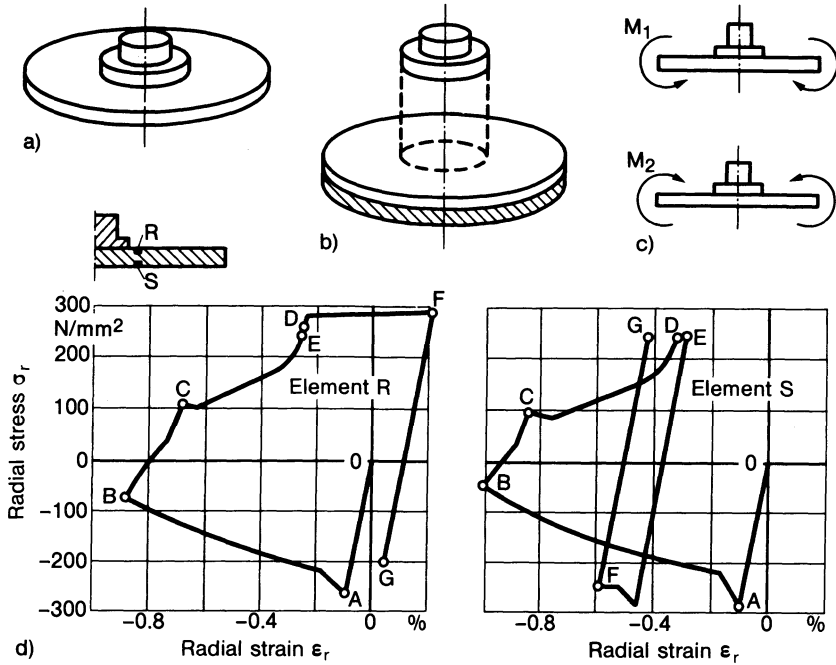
Bolt on plate of beryllium (a), pressure butt welding followed by machining of the hatched layer (b), loading of plate edge by alternating bending moments  $M_1$  and  $M_2$  (c), stress-strain cycle in solid ring elements R and S (d): heating OAB, cooling BCD, machining DE, loading EFG; after Cyr, Teter and Stocks [224]
